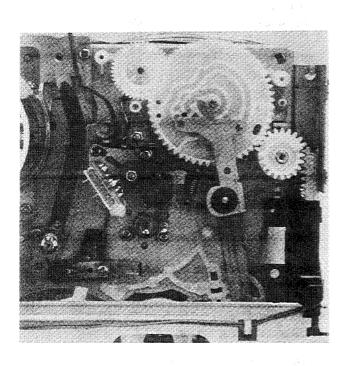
Pinch Roller Assembly and Master CamGear Assembly
